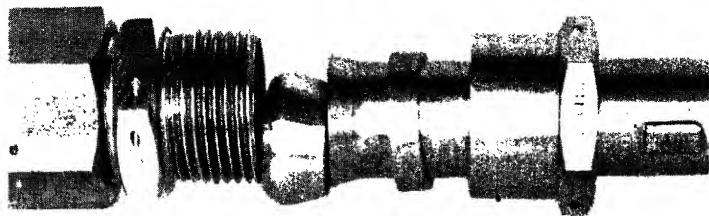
SHOWING THE CORRECT ASSEMBLY OF THE A/M TYPE OF COUPLING.
